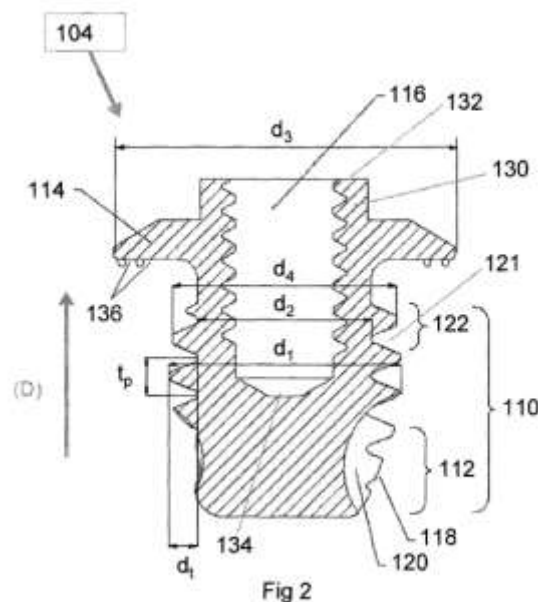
depicts a cross-sectional view of the fixture of Westerkull '794. *Id.* at 5:41–42.
